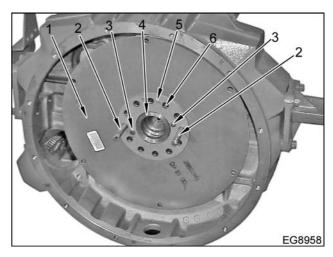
Remove flexplate (vehicles equipped with MD-3000 series transmissions
